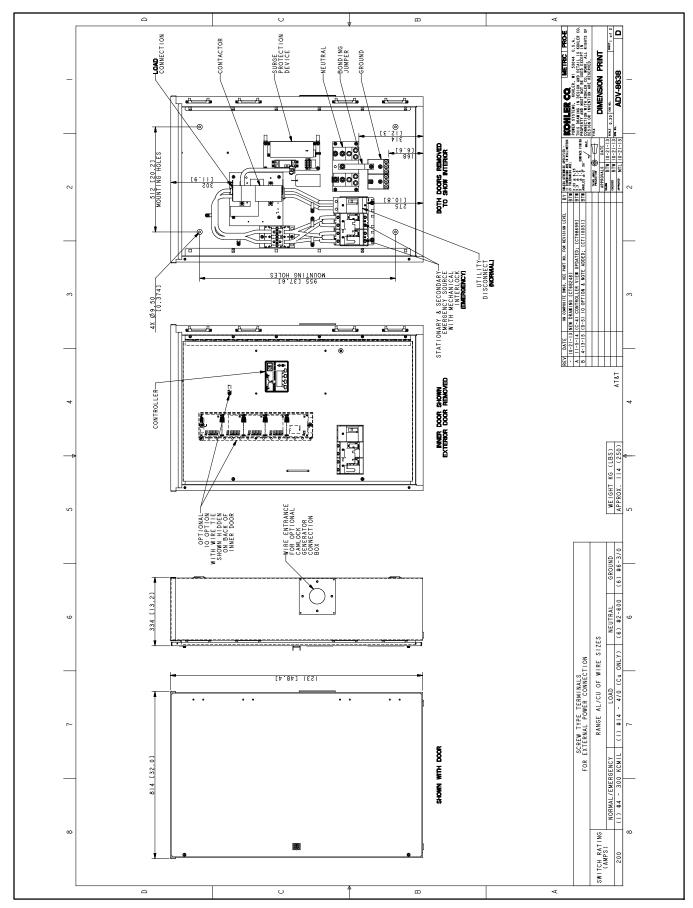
Transfer Switch Dimension Drawing, ADV-8638, Sheet 1
